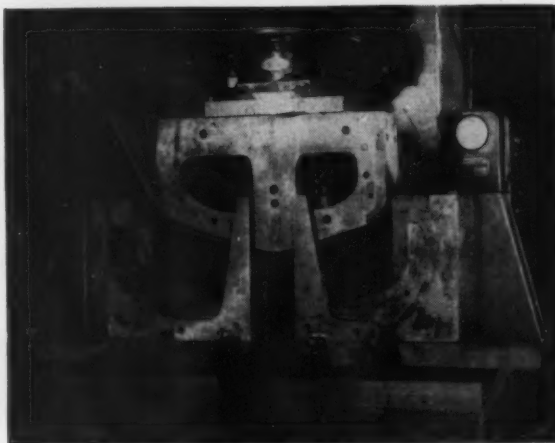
Forming bumper in hydraulic press. Same die can be used for two sizes of bumpers.
